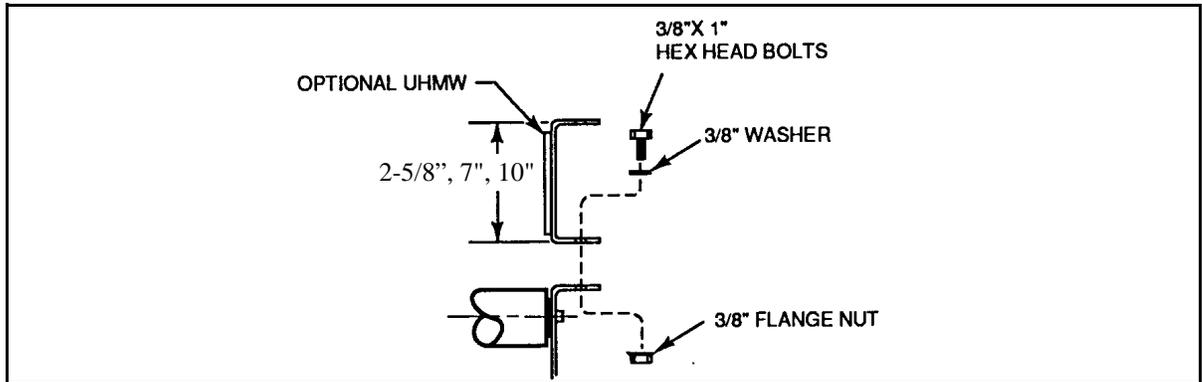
Mounting Plain/UHMW Face Side Guide
